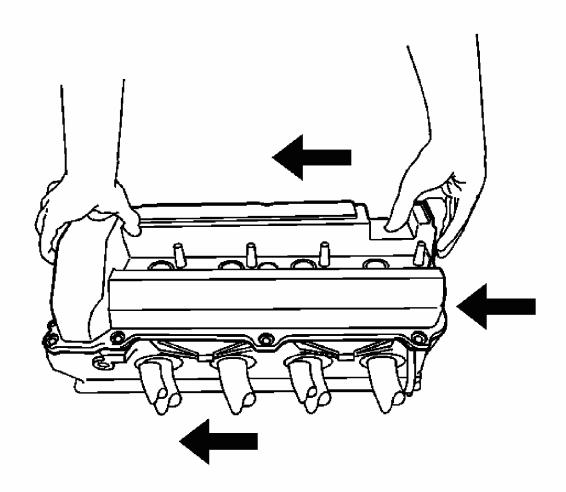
Positioning Left Camshaft Cover Courtesy of GENERAL MOTORS CORP.
